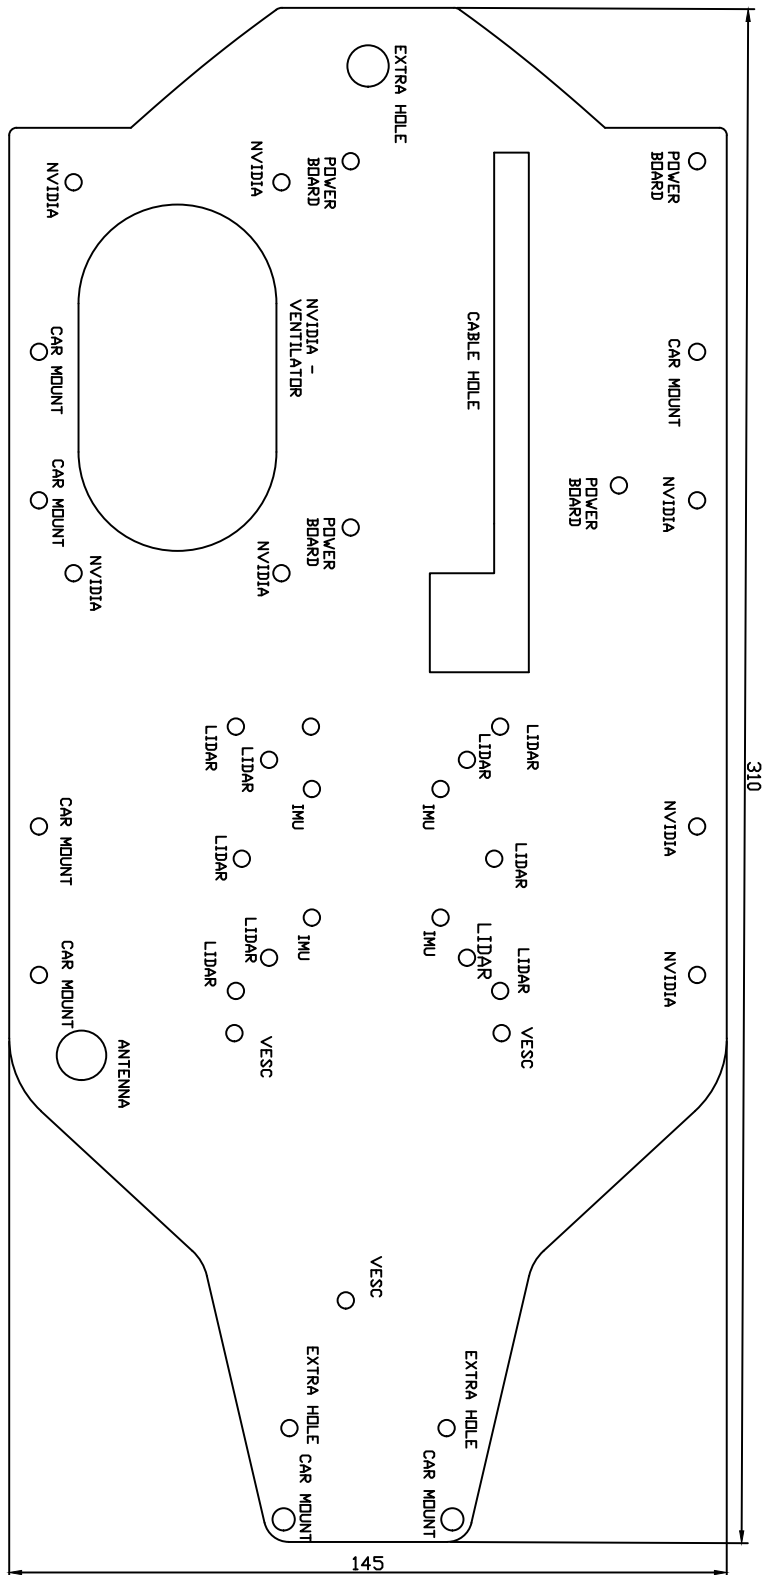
Board design for the smaller car model.(dimensions in mm)
